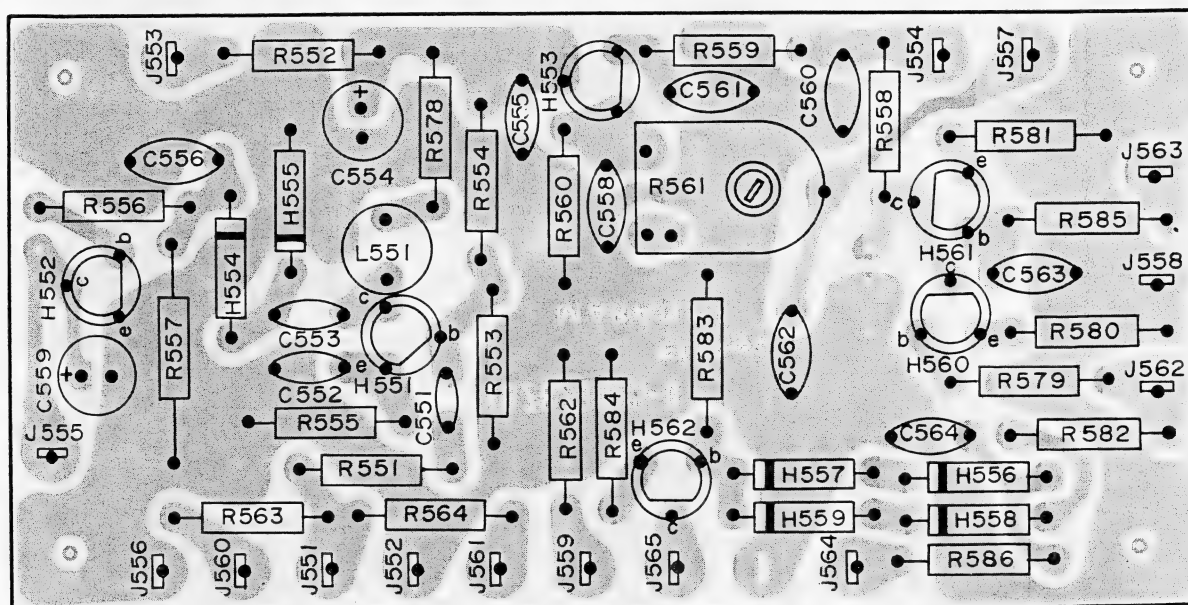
Muting Control Amplifier Assembly P550 Component Locations
